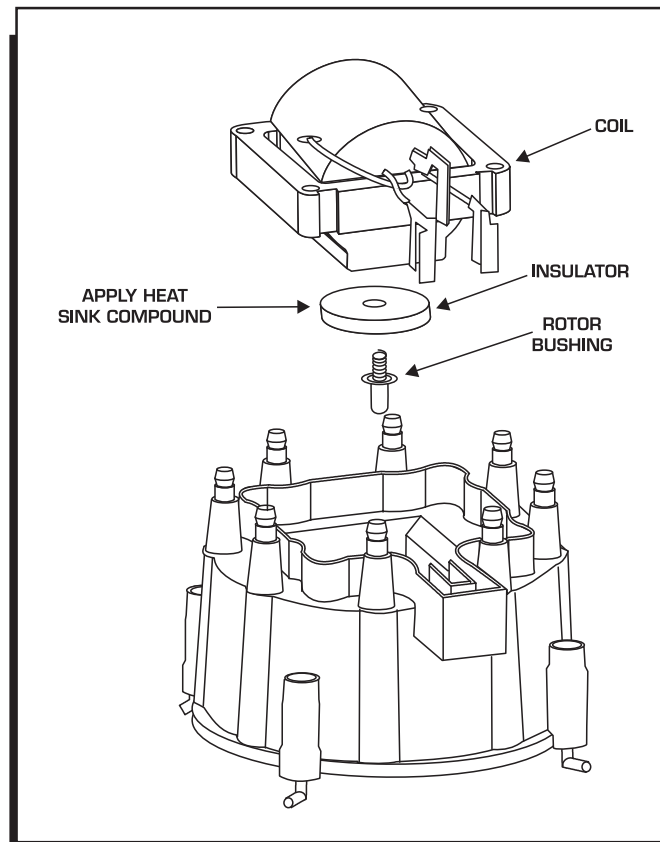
Installing the Coil Rotor Bushing and Insulator.
